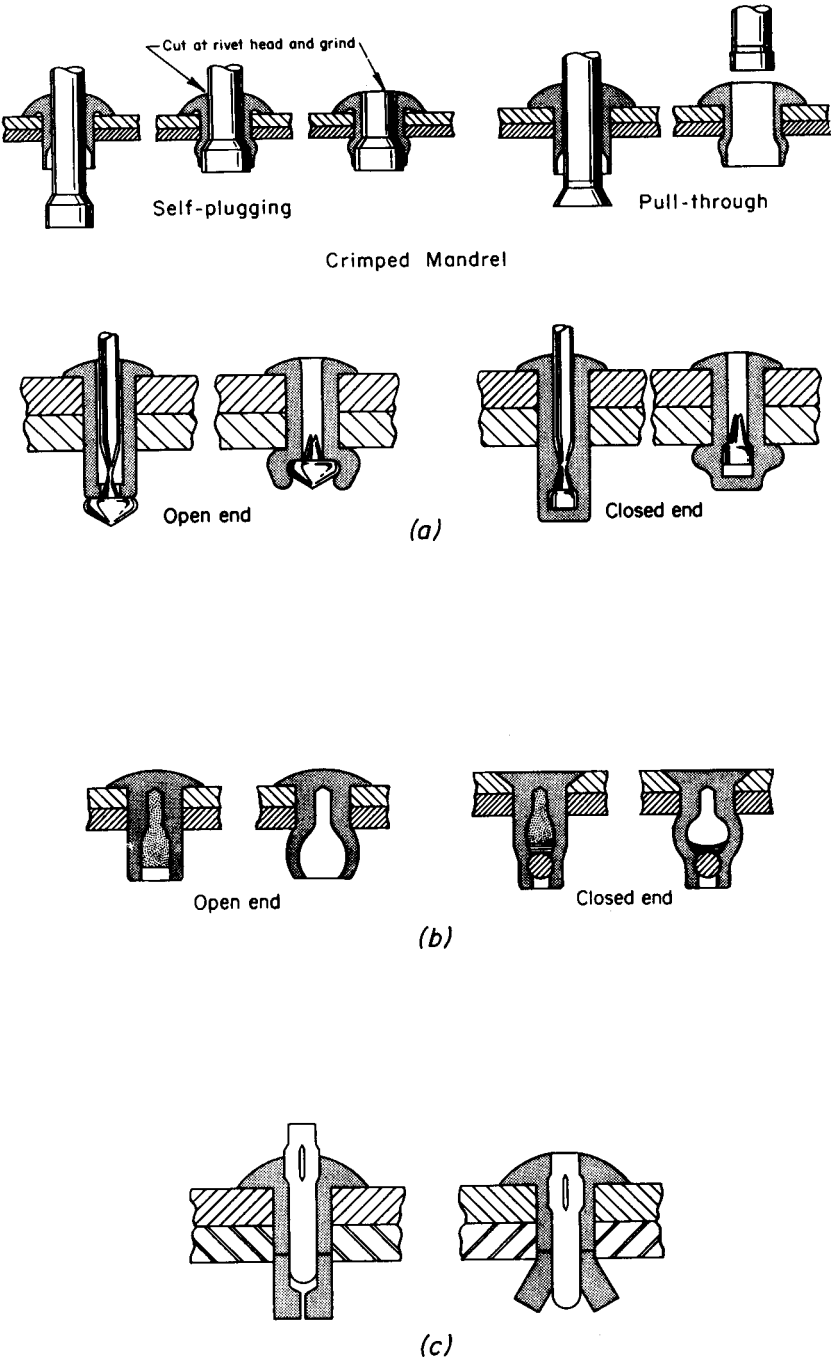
Types of blind rivets and methods of setting.^{8.3} (a) Pull-stem rivets. (b) Explosive rivets. (c) Drive-pin rivets.
